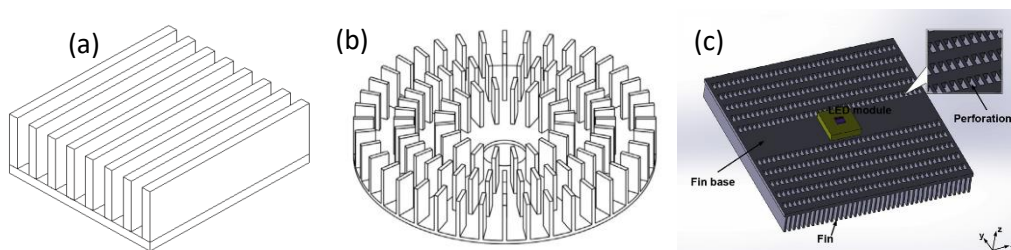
(a) Horizontal plate fin heat sink [37] (b) Radial heat sink with pin fins [38] (c) Heat sink with perforations [39]
